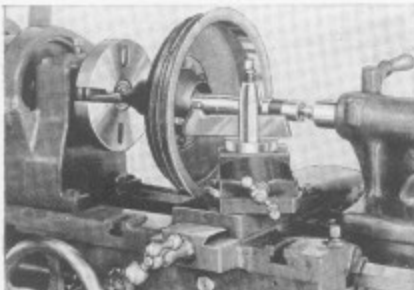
Truing a Worn Brake Drum of a Demountable type Rear Wheel.
